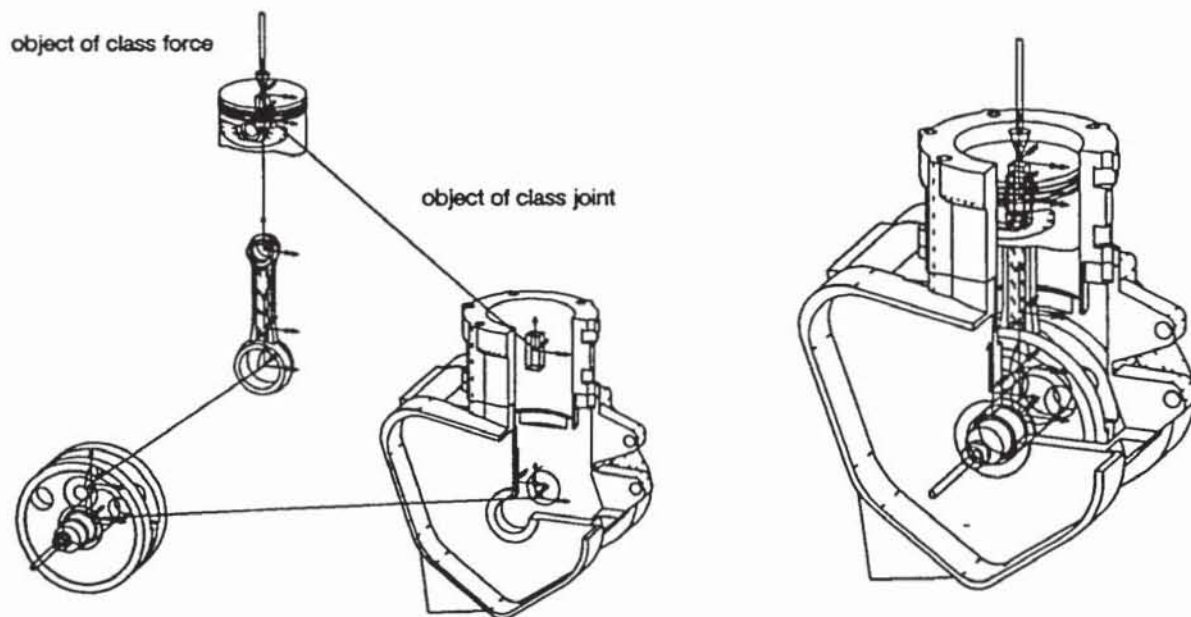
DISASSEMBLED AND ASSEMBLED MECHANISM WITH JOINT AND FORCE OBJECTS
